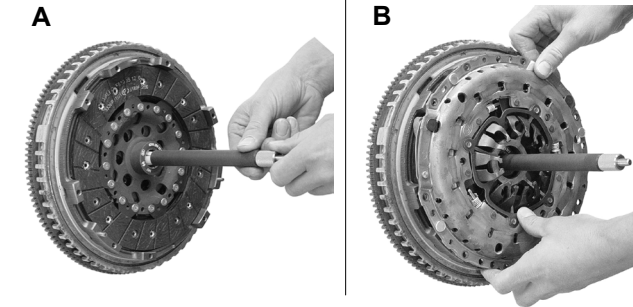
Screw in threaded bolts, mount clutch pretensioner.
